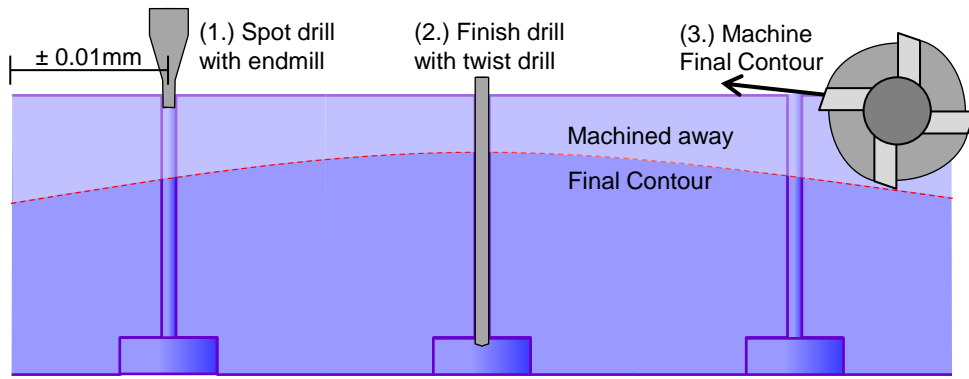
Machining process used to ensure accuracy of drilled holes to 0.01mm
